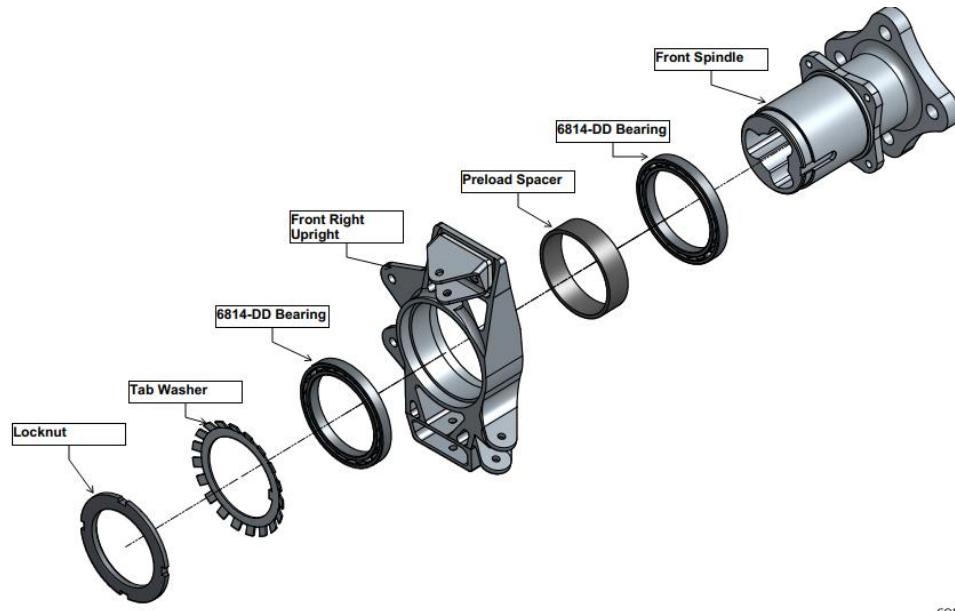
NU 24 Front Right Upright and Spindle Assembly
